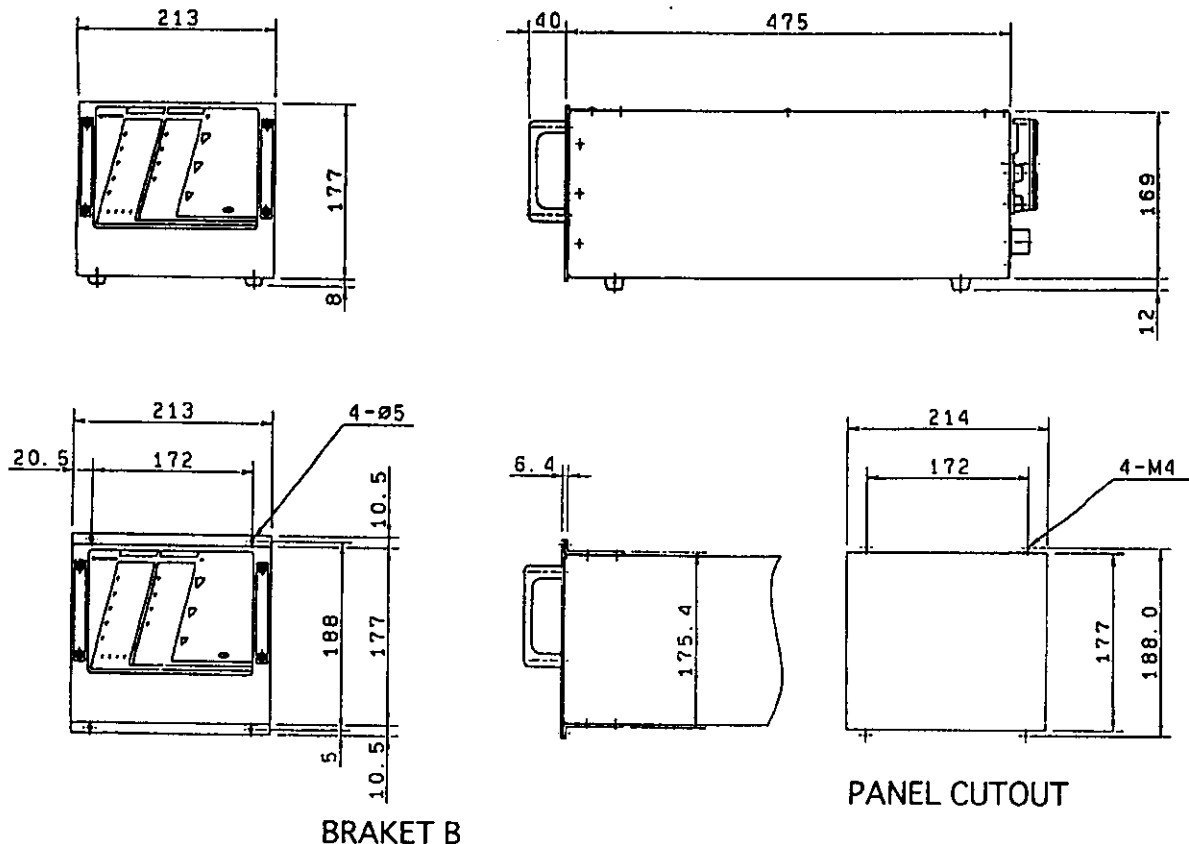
Outside Dimensions of Power Unit EI-1003M
